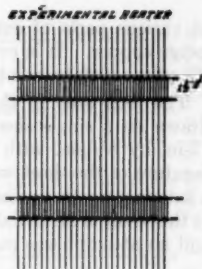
EXPERIMENTAL HEATER OF 16 GAGE COPPER SHEETS
